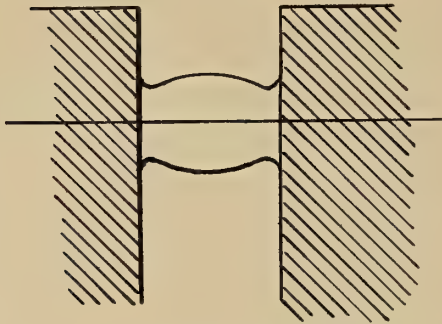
CONSTRUCTION OF CRANK-PIN SUGGESTED TO PREVENT BENDING
